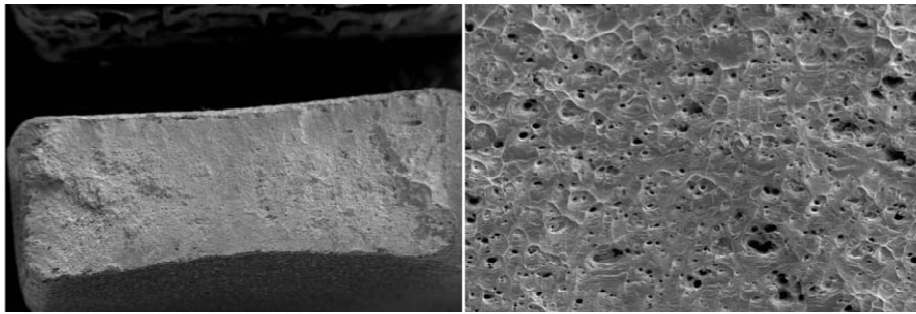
6: Fractured surface of sintered specimen under optimal sintering and molding conditions [35]
